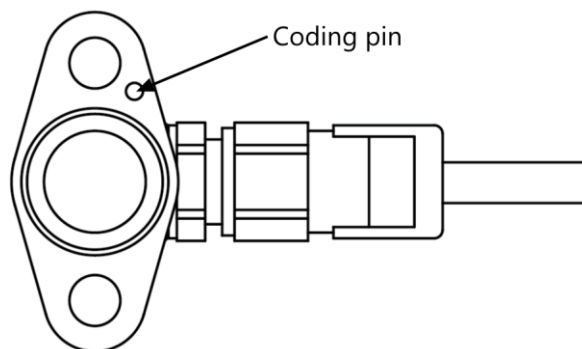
/7: Cable outlet bent, vertical to centre line of the mounting drill hole of the flange (example)
